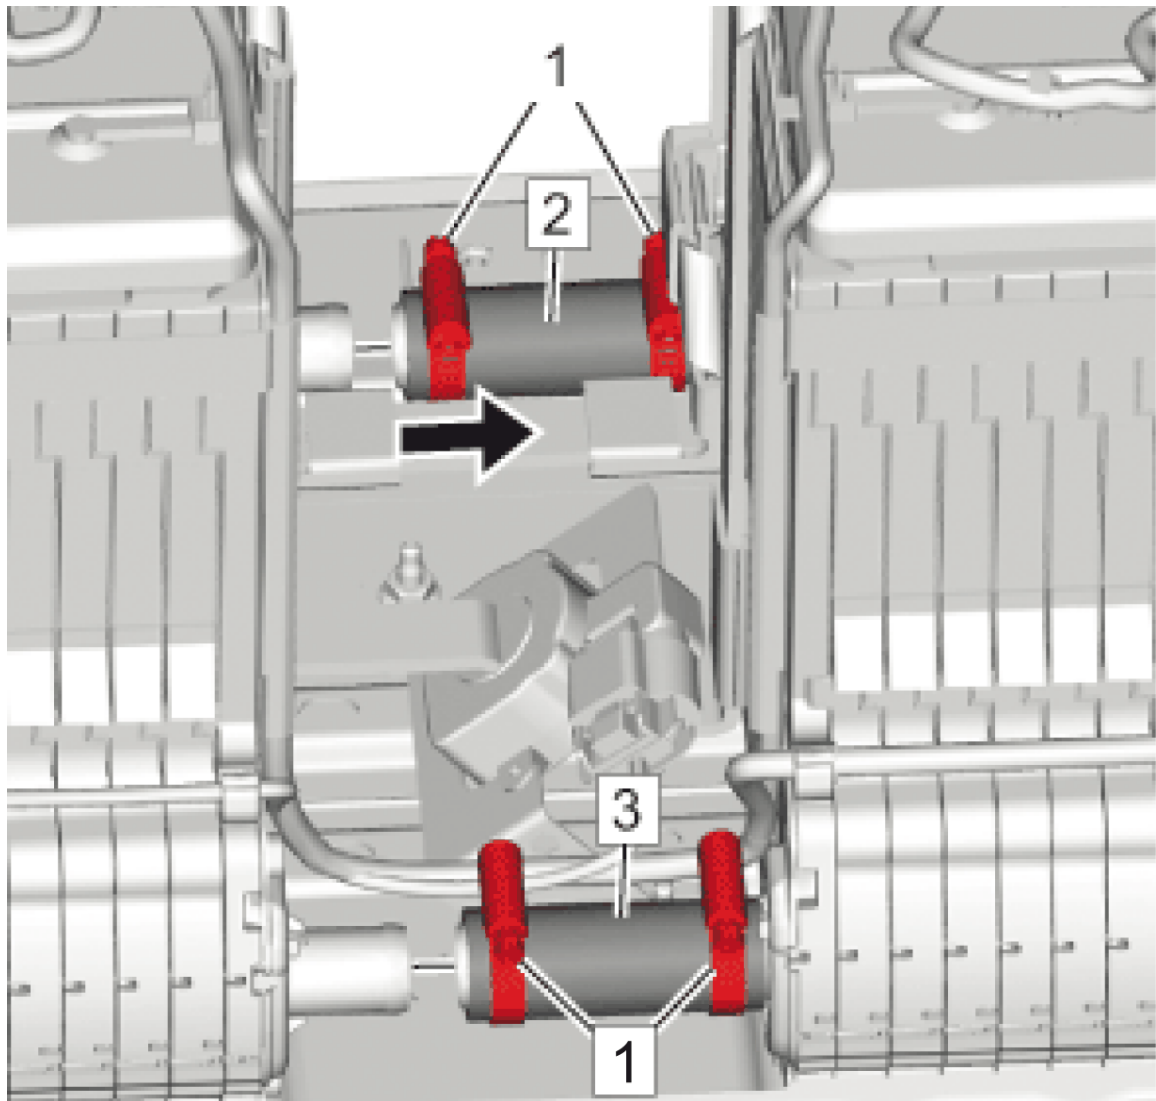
Cell Battery Cooling Plate Hoses And Clamps
